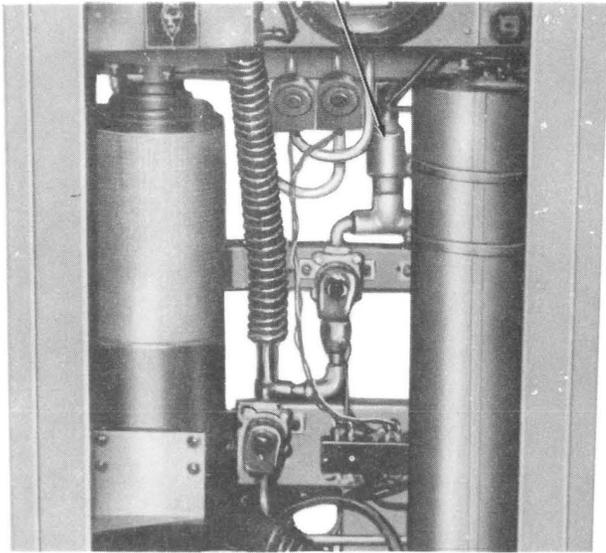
Refrigerator and Evaporator for Assembly Removal
